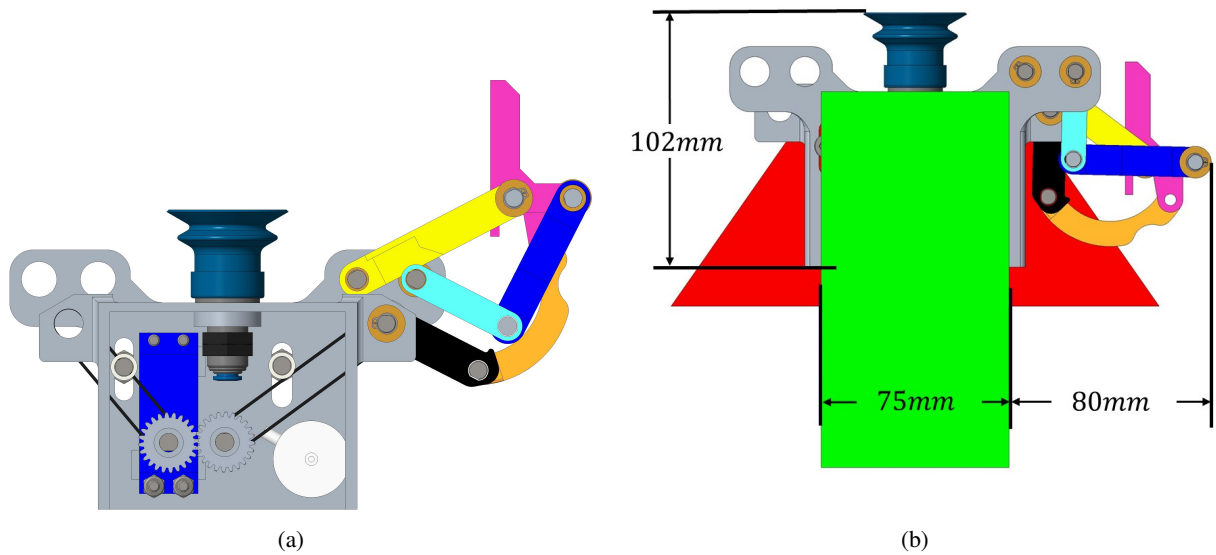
(a) Actuated prototype design, (b) Gripper outside dimensions
